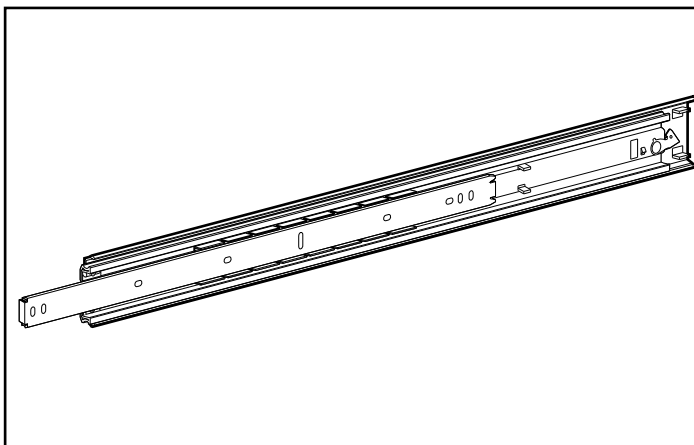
Slide rail assembly with outer bracket rail and inner component rail
